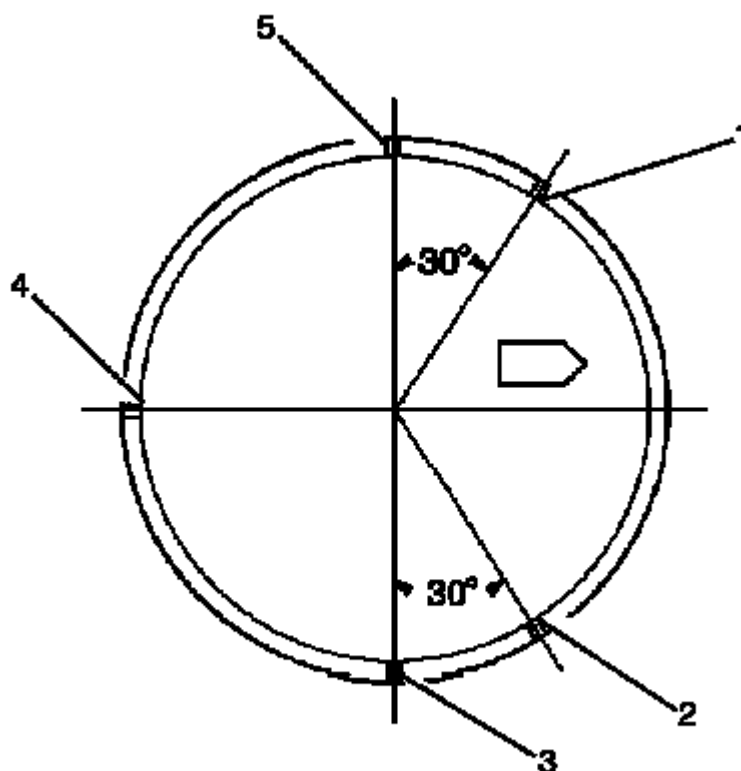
View Of Second Ring, Oil Control Ring Expander, Top Ring, Lower & Upper Oil Control Ring
